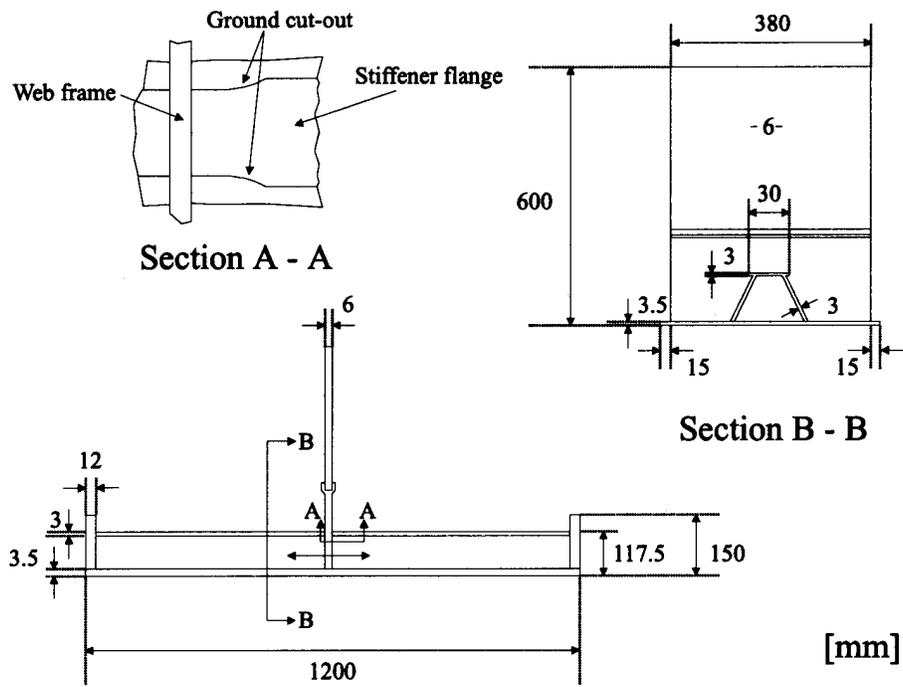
Detail 28 Box Stiffener/Deep Frame Connection – Bending In Air.
